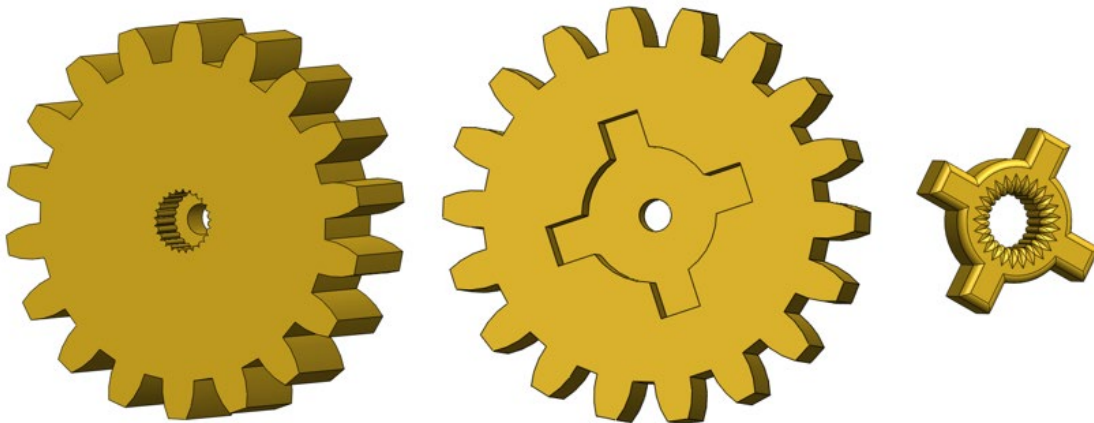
Initial Gear (Left), Gear with Cutout (Center), and Insert (Right)
